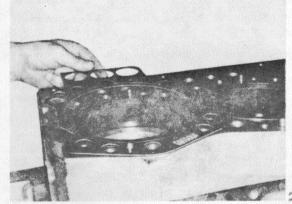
N-26. Install the Cylinder Head Gasket 2. Put the water, oil and push rod grommets into position in each cylinder head gasket, Figure 16N-27. One capscrew
